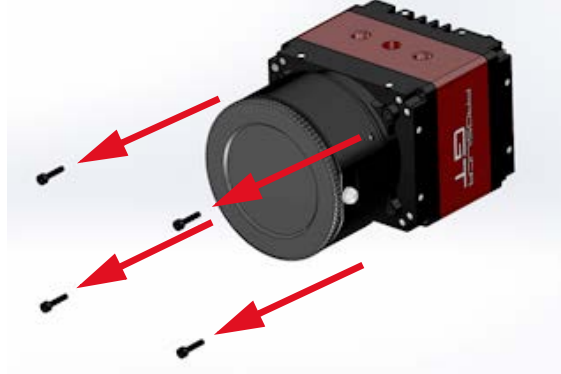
Removing the four M2 x 10 socket head cap screws of the front assembly
